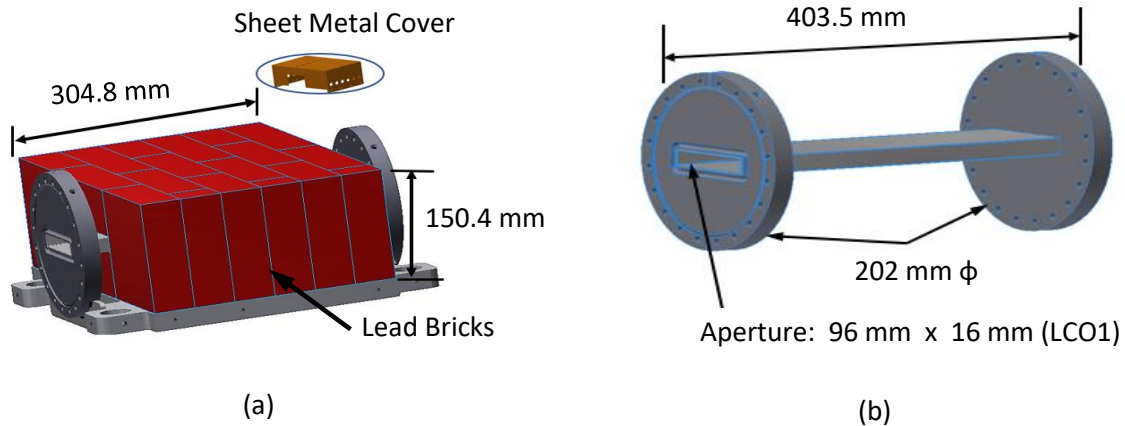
Lead collimator assembly for HEX front end, (a) assembly with lead bricks stacked around a 304 SS tube, (b) overall dimensions of the 2 mm thick tube welded to two 202 mm diameter 304 SS flanges.
